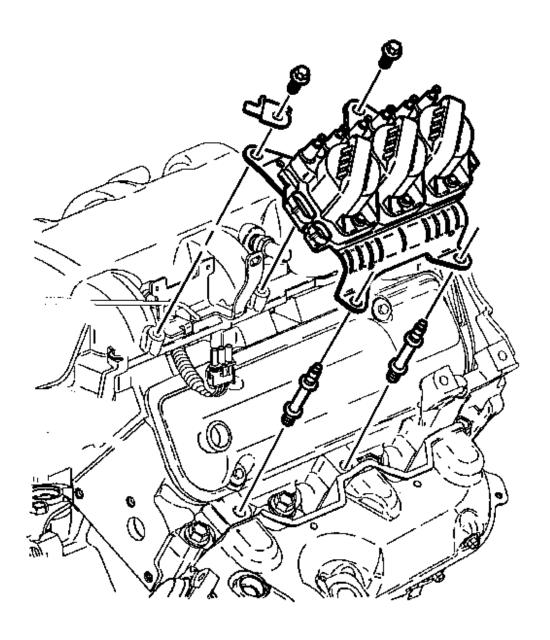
Removing Electric Ignition Control Module Courtesy of GENERAL MOTORS CORP.
